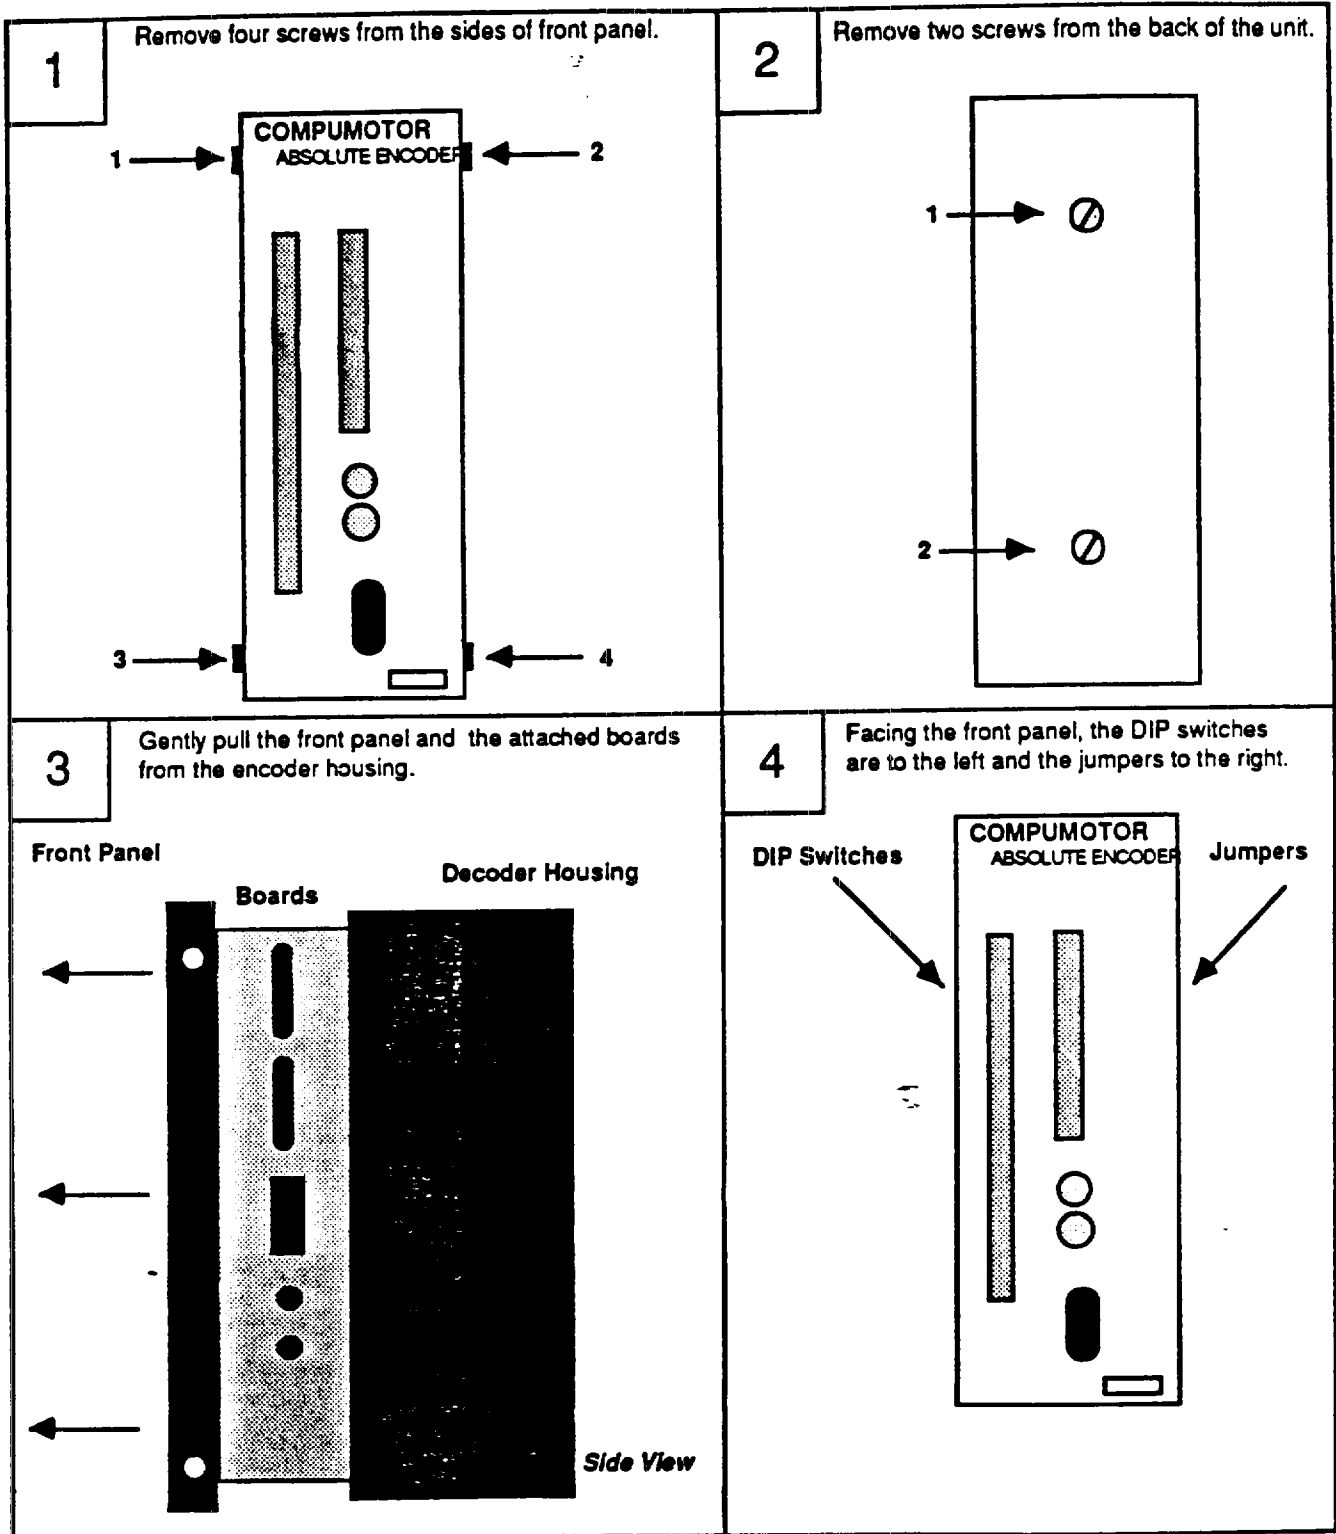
Decoder Box DIP Switch and Jumper Location
